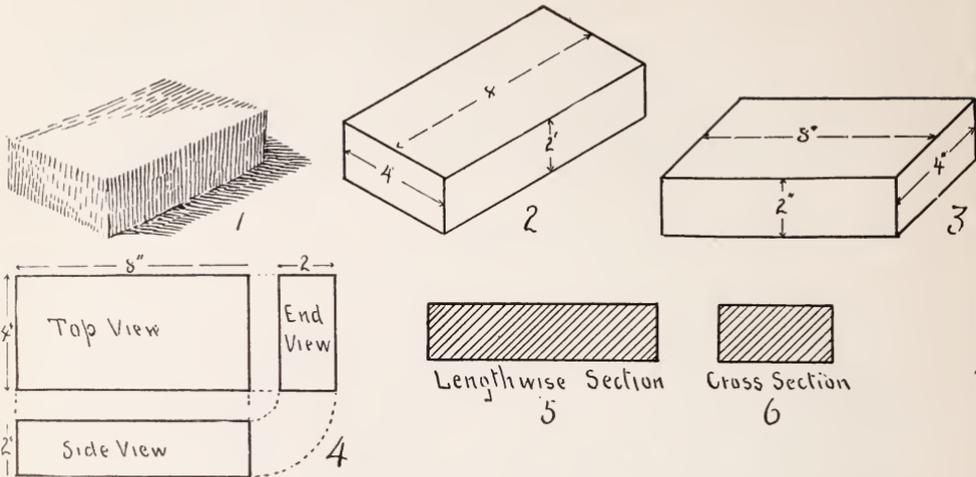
represents an isometric drawing of this brick. This drawing differs from the perspective drawing in the lines of the faces not converging, but being perfectly parallel. All of the lines of isometric drawing slant 30° from the horizontal, and the measurements are exactly as they measure on the drawing in the direction of the 30° lines.
